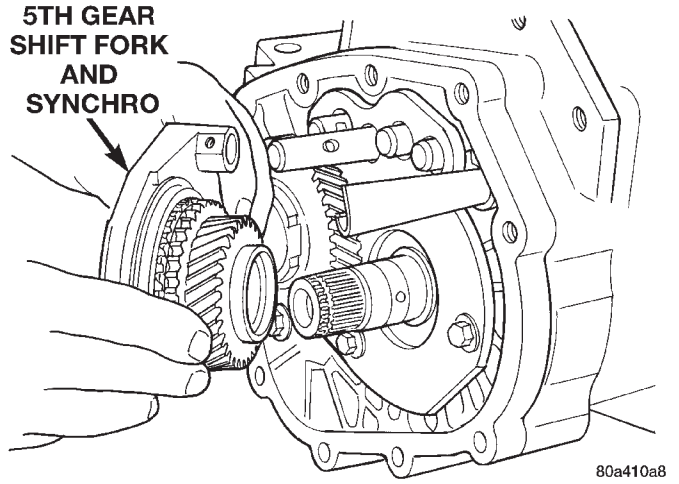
5th Gear Shift Fork, Rail, and Synchronizer Removed
